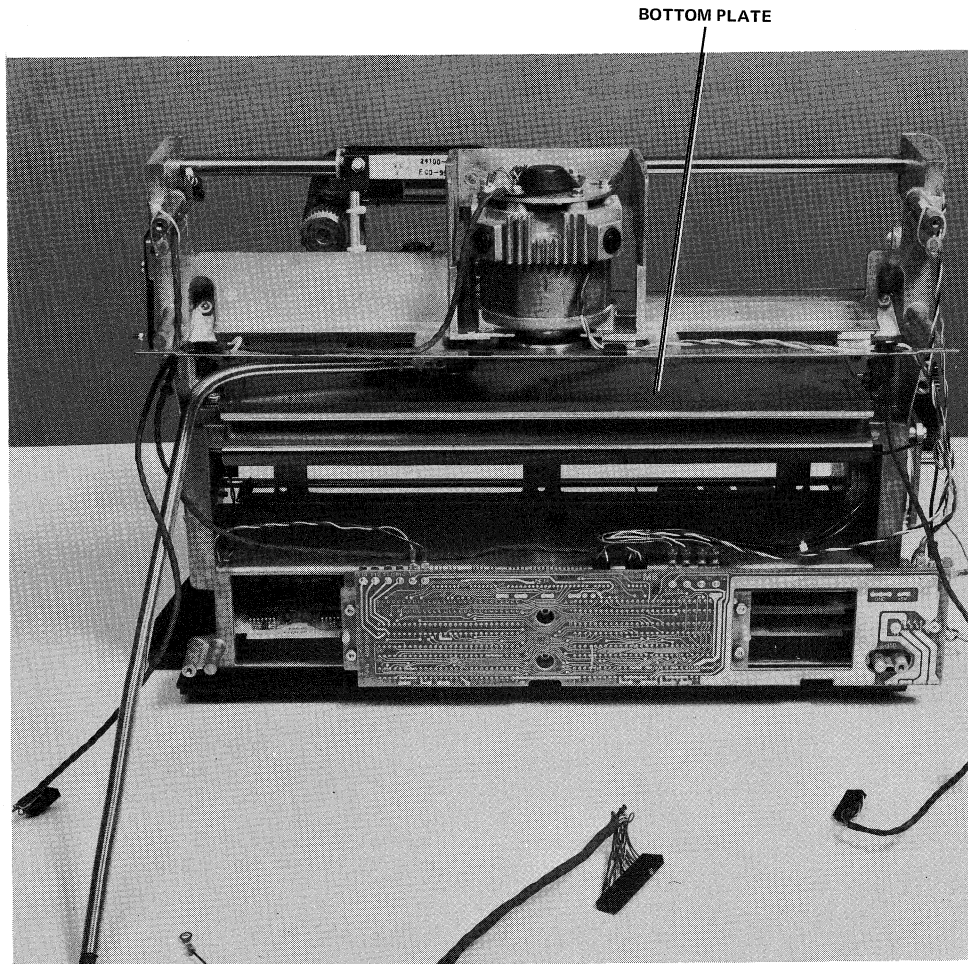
Bottom View Showing Connectors, Cables, Tie Wraps, and Attaching Hardware
